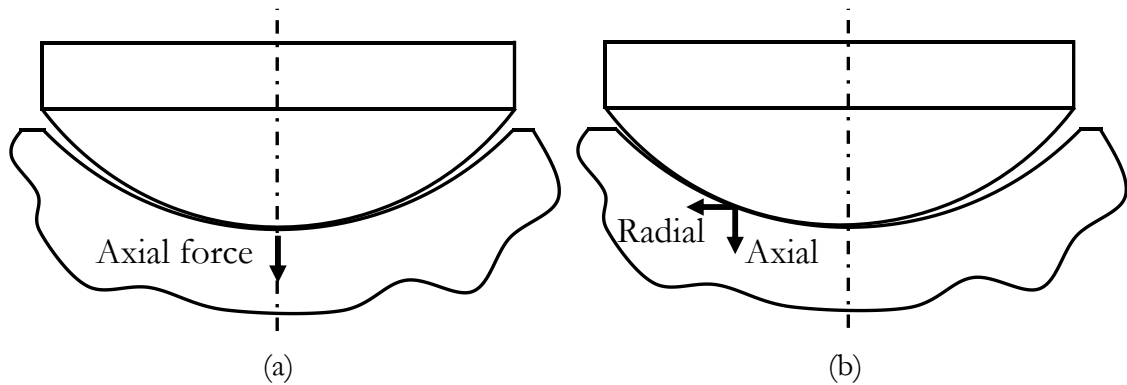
Upper clamping tool arrangement: (a) No misalignment; (b) Misalignment.
